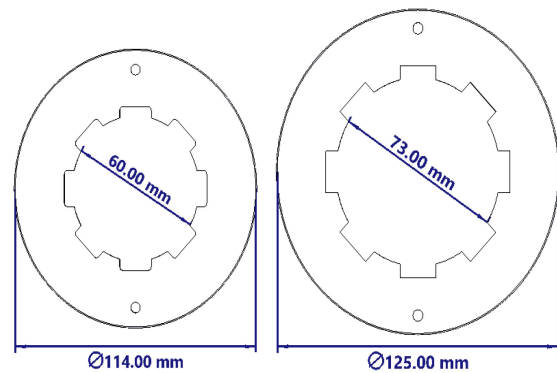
Lower part of test cap dimensions for (a) TX and (b) RX.
